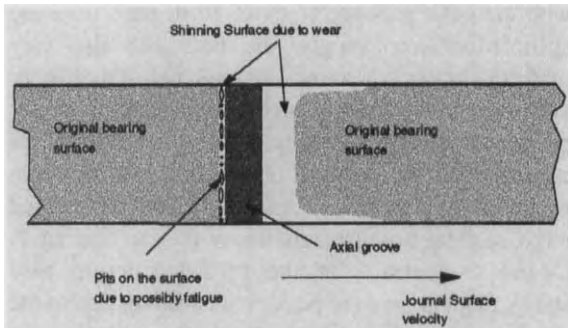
Surface Condition of a tested Sapphire seizure test bearing
